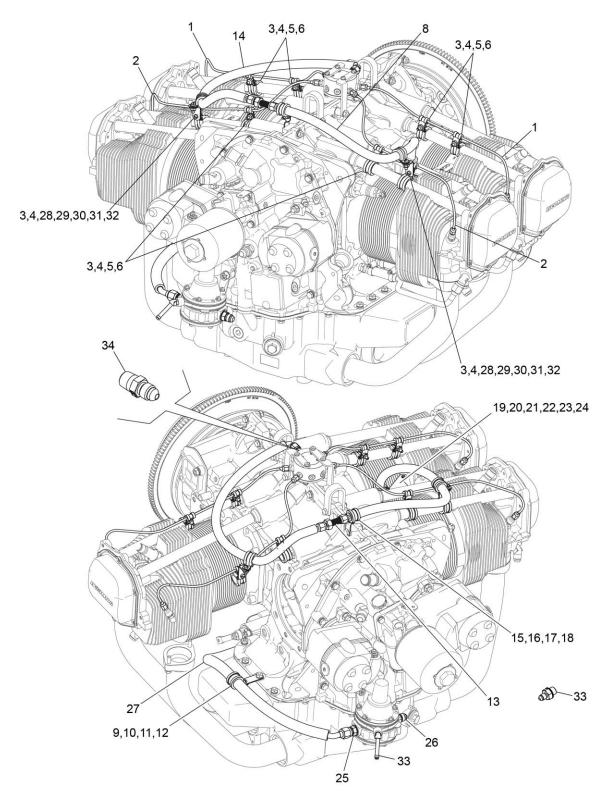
B Fuel Lines, Fuel Hoses, and Attaching Parts (C1B6 and C3B6)
